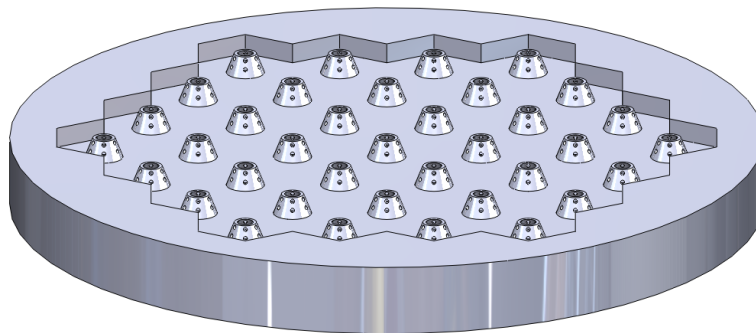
MIMO - Base Feature AMM Panel - CAD - Horizontal Cross-Section View
